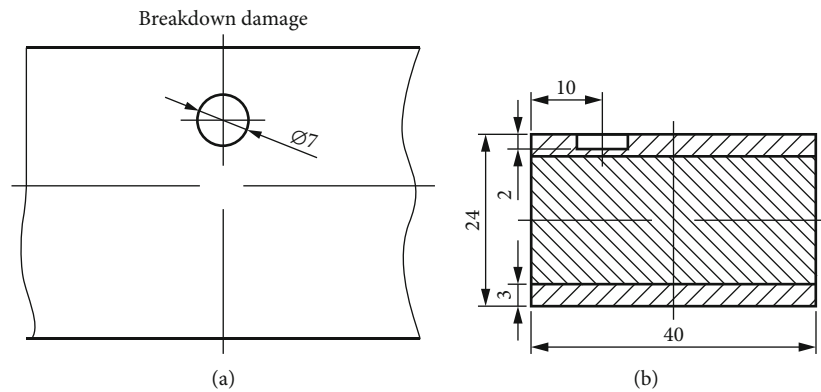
(a) Detail view and (b) cross-sectional view of damage.
